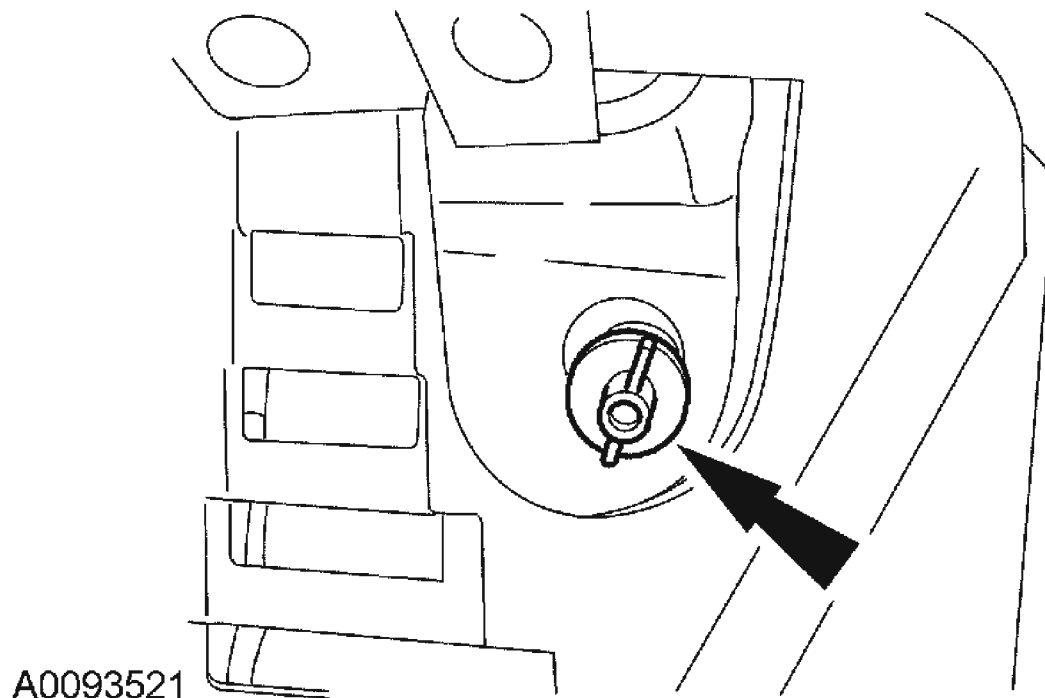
Removing Rear Lamp Retaining Nut (3-Door/5-Door/Wagon)
